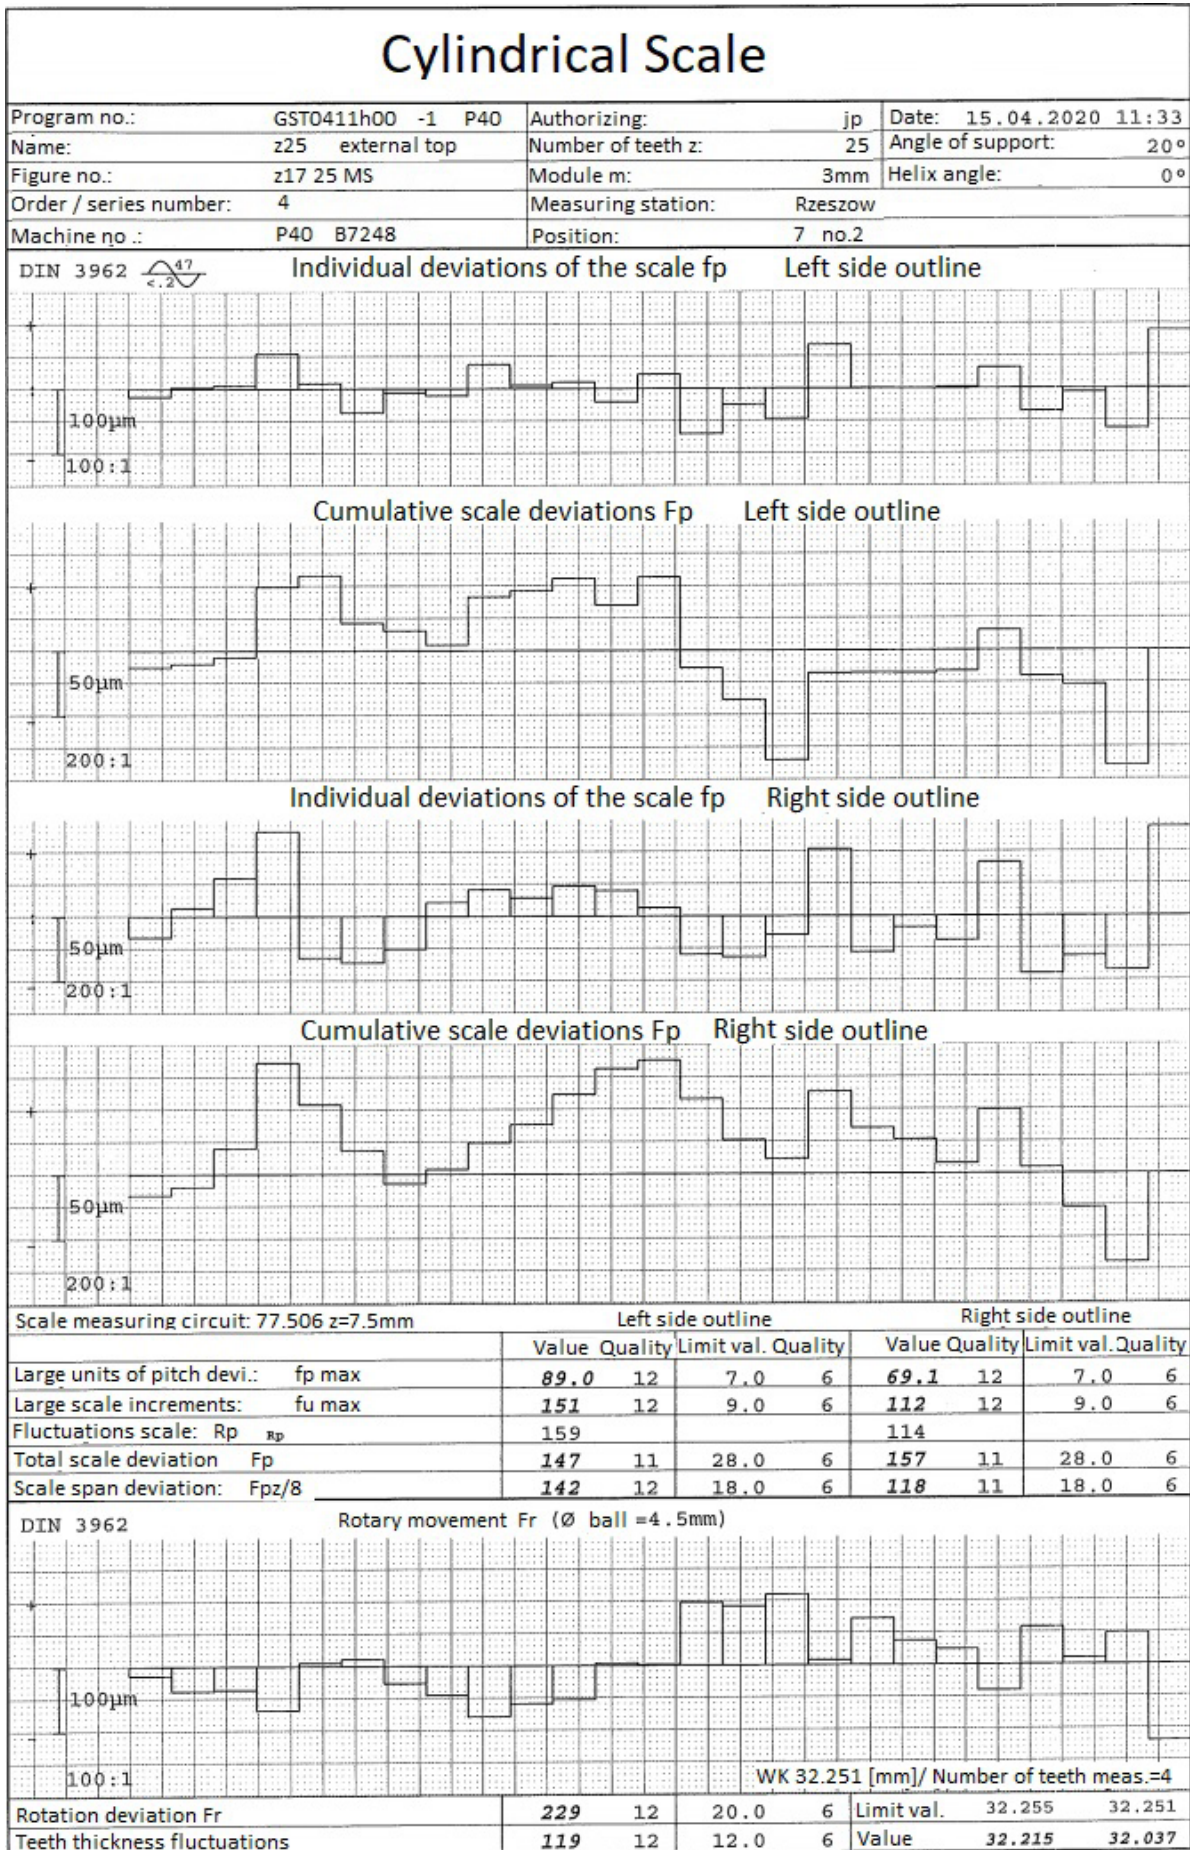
Tooth pitch and thickness of a large gear wheel (KZ25) made of P2 material
